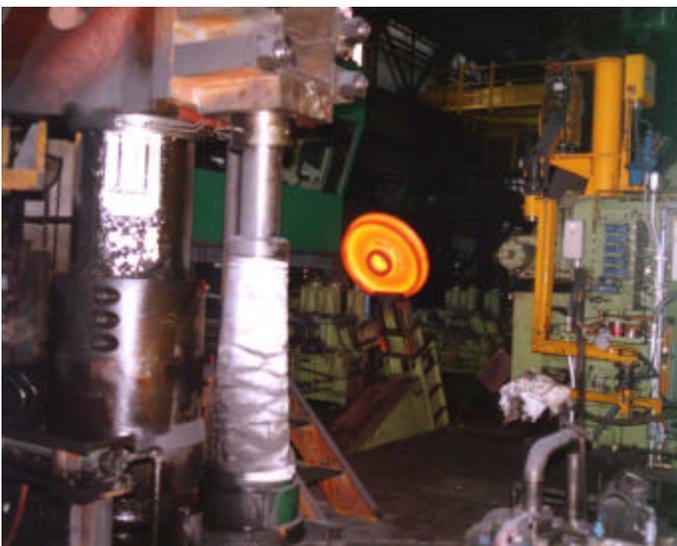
A robot manipulator passes a wheel from the rolling mill to the dishing and punching press.
